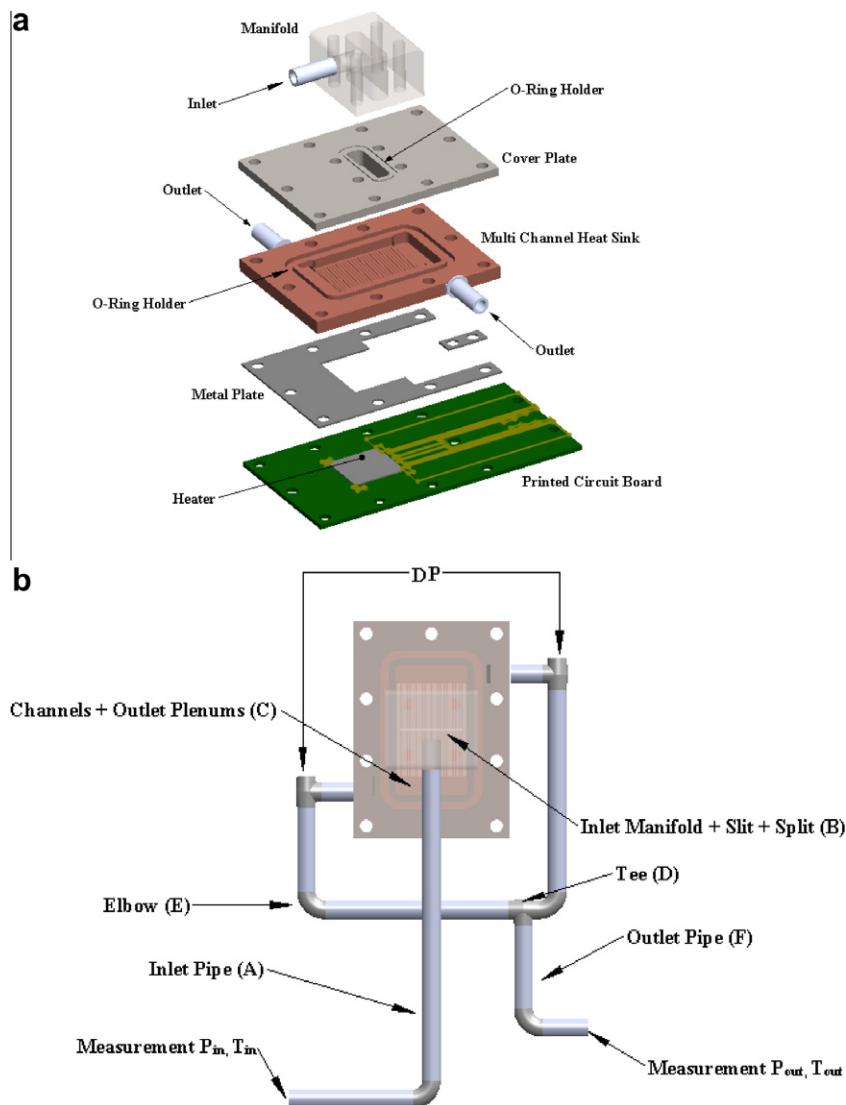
Schematic diagram of the disassembled test section (a) and upper view of the test section (b).
